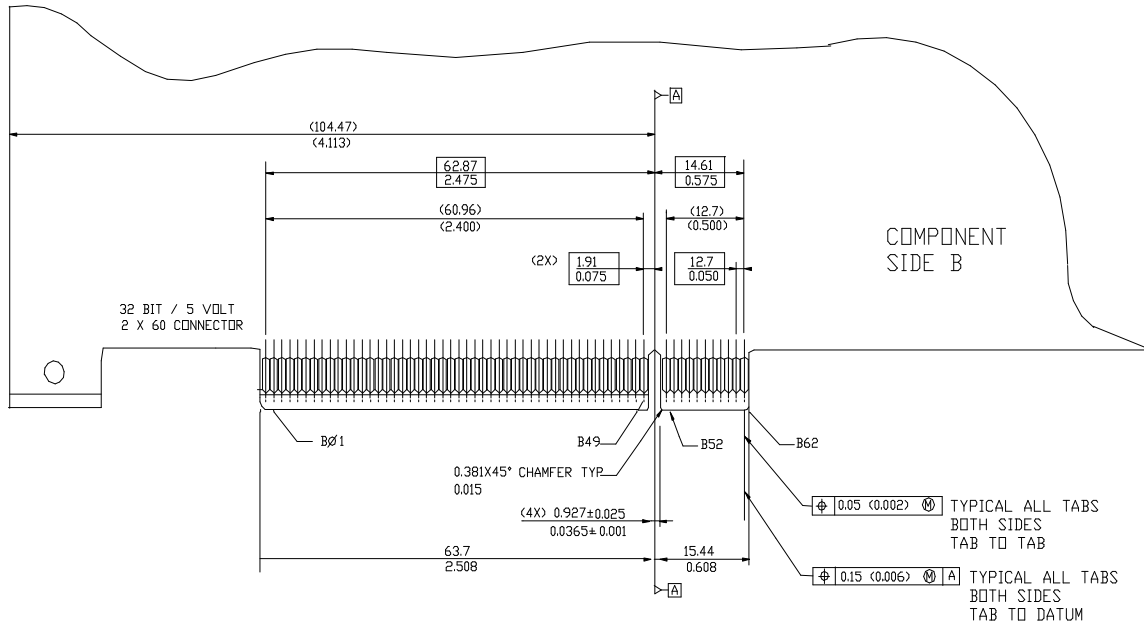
5V/32-bit Card Edge Connector Dimensions and Tolerances
